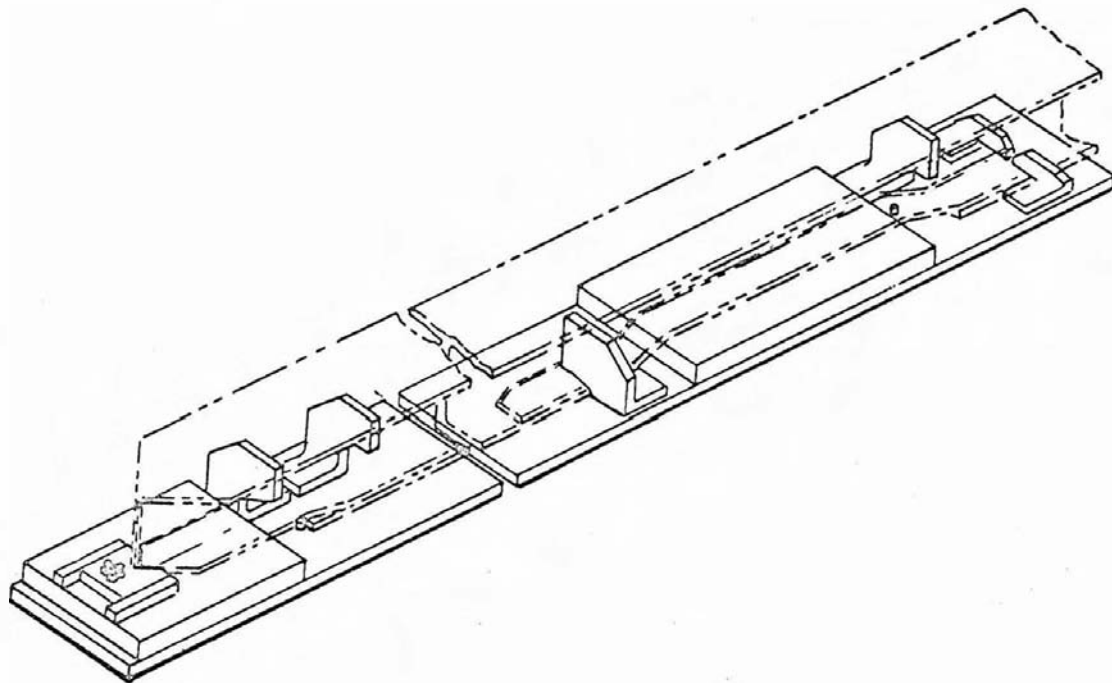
9. Base Heatshield Beam Assembly, Assembly Fixture
